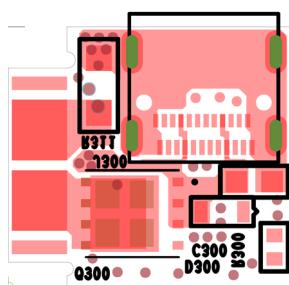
USB PD Board Printed Circuit Layout, Top.
